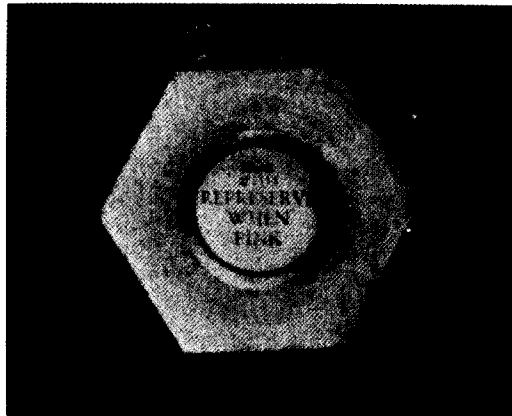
Hexagon Head Humidity Indicator Plug Installation
